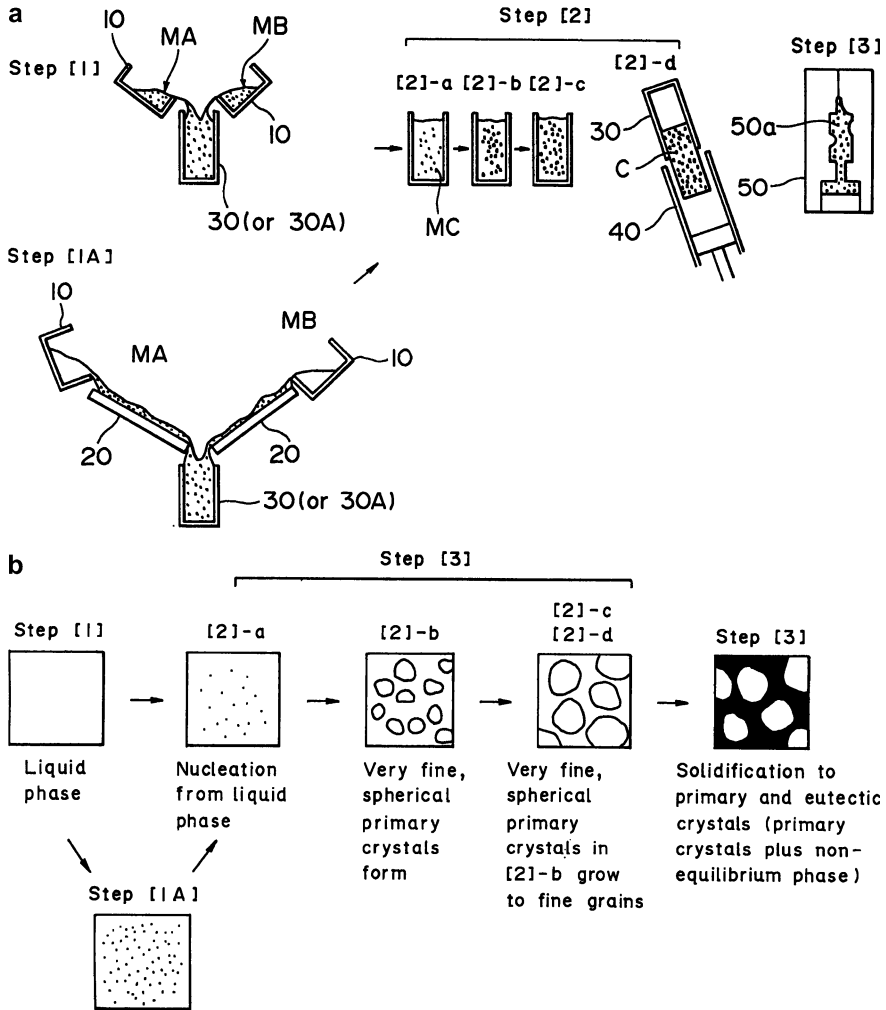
(a) Schematic representation of one mixing process; (b) a diagrammatic representation showing the metallographic structure of a shaped part (10) ladle; (20) cooling jig; (30) ceramic container; (40) injection sleeve; and (50) mold [30]
